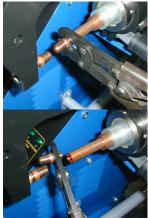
Optional Weld Cap Removal Tool
